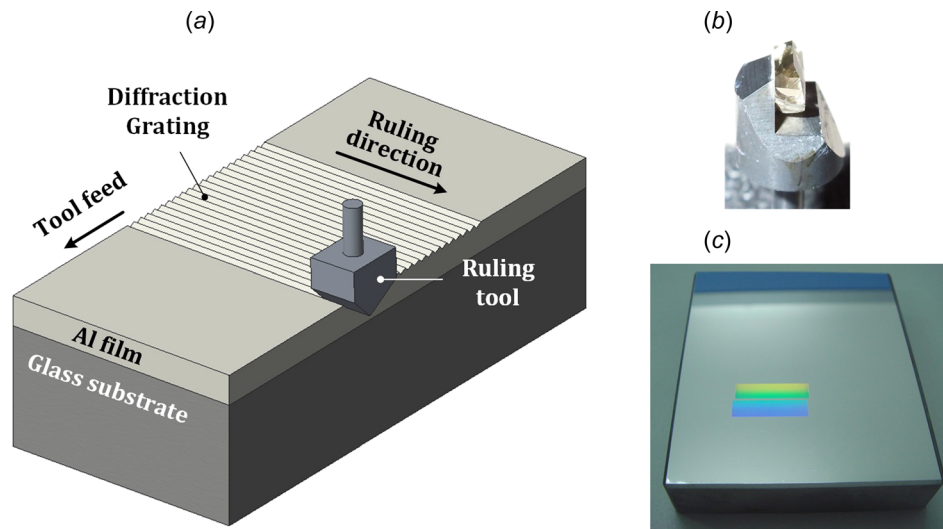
Ruling tool and workpiece: (a) schematic of the mechanical ruling process, (b) diamond tool, and (c) a fabricated diffraction grating
